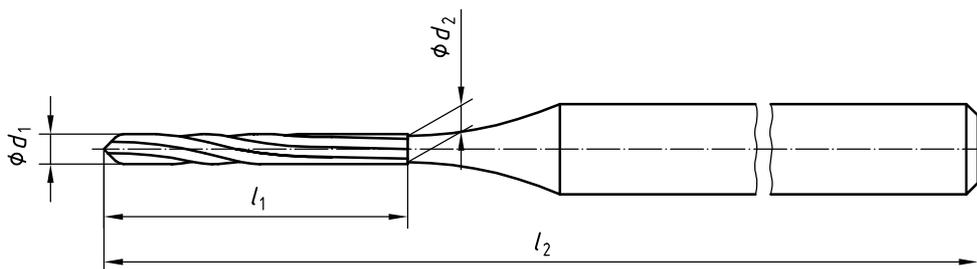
Torpedo, cylindrical, head length 8 mm, carbide finishing burs
